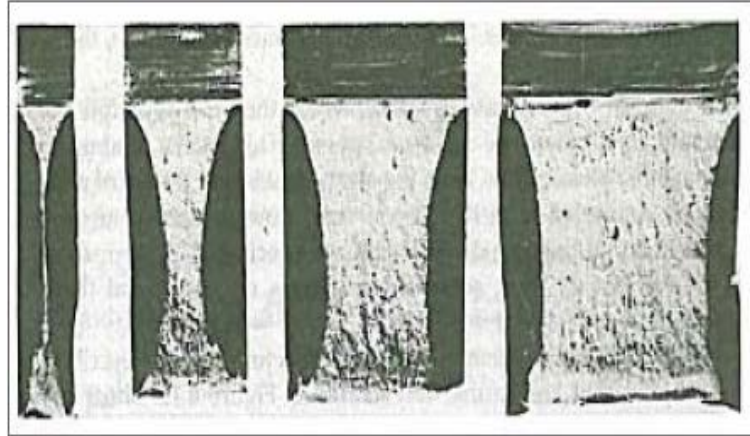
7: Fracture surfaces of Charpy impact tests for plates with different material thickness [6]
